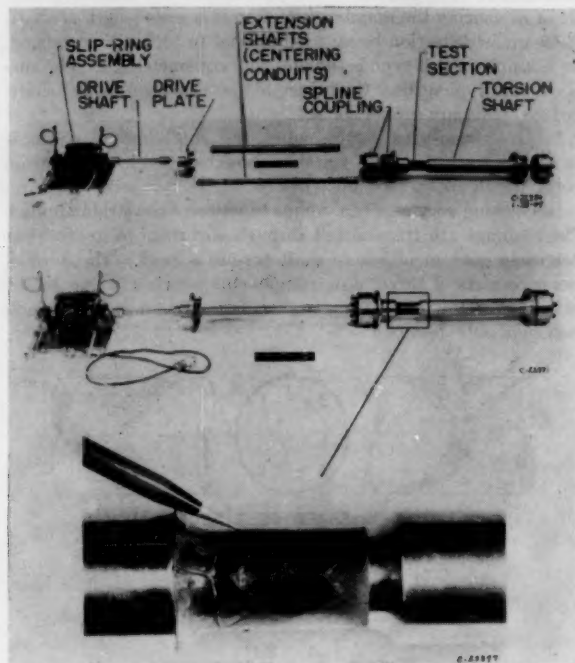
TYPICAL STRAIN-GAGE TORQUEMETER ASSEMBLY
